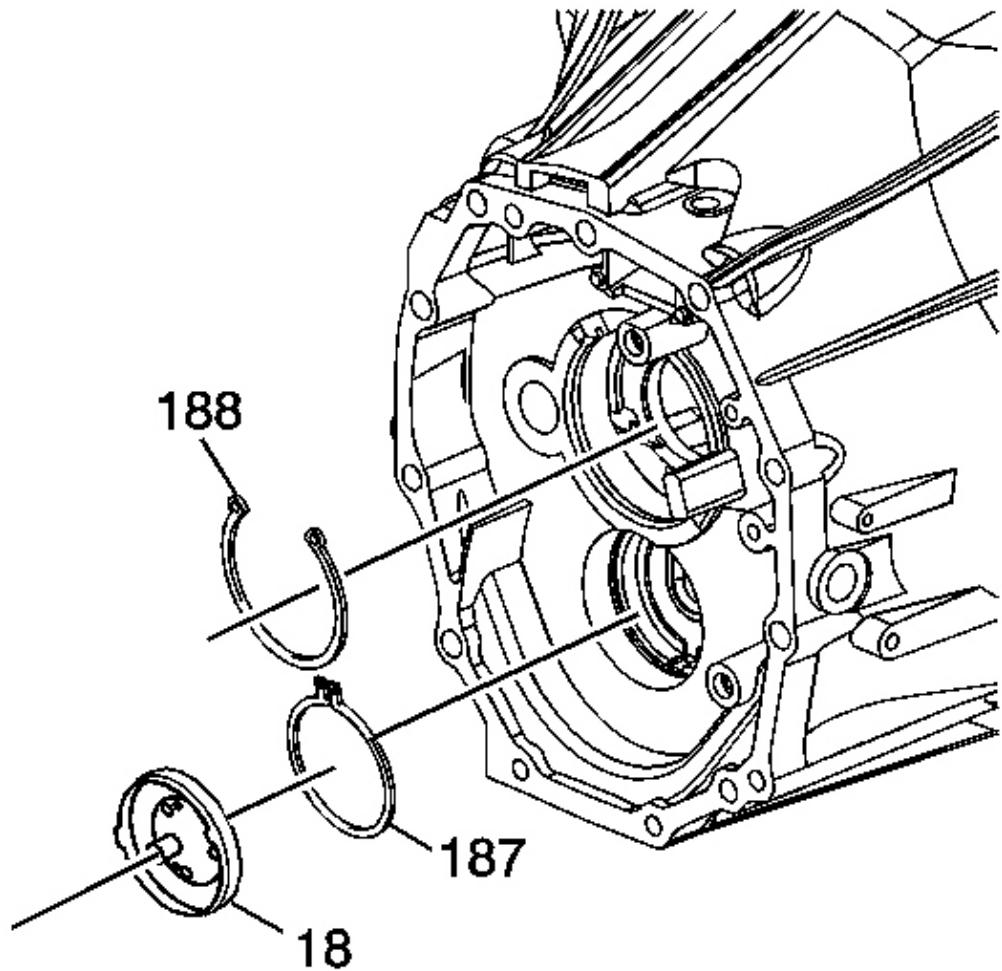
Front Input Shaft Oil Slinger & Retainers
